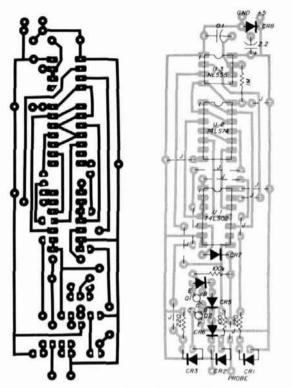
Suggested printed-circuit board layout and parts placement diagram for the logic probe. If desired, prepunched board and simple point-to-point wiring may be used.
